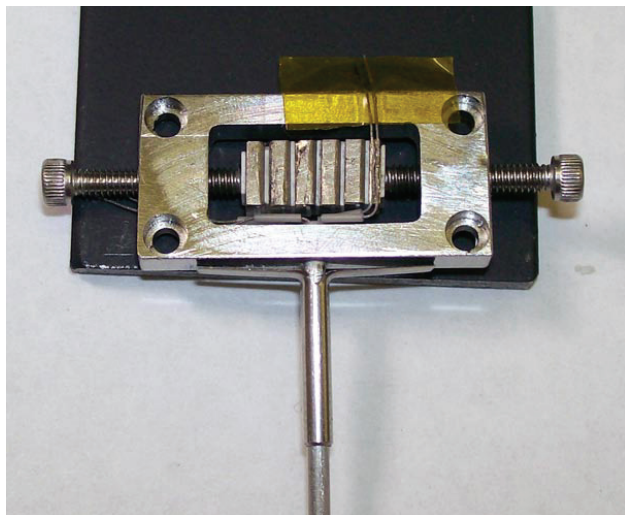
Tape is used to hold the thermocouple lead wires in place for welding. The excess lengths of lead wire are clipped off after welding.
